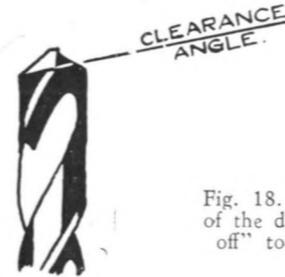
The cutting edges of the drill must be "backed off" to provide clearance.
